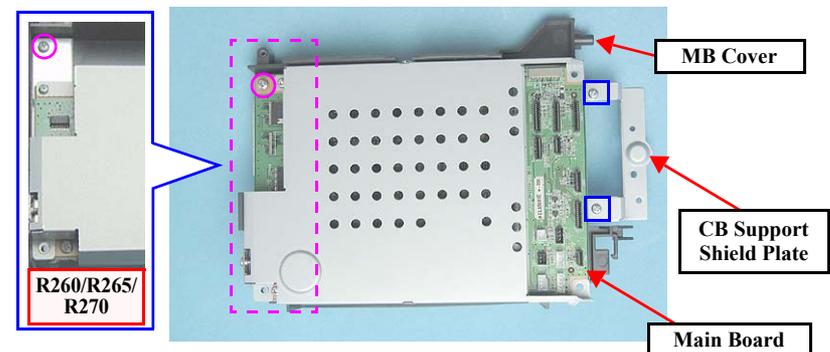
Removing the MB Cover/CB Shield Plate Support
